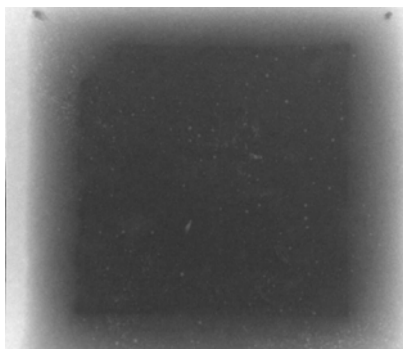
TZM Picture; Vacuum Soldering using Forming Gas 95/5
